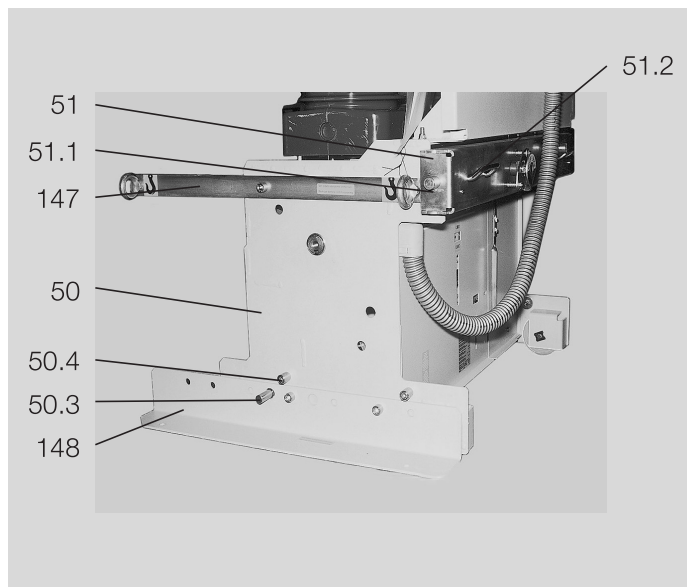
/10: Circuit-breaker, type VD4, on withdrawable part, mechanism side viewed from the left
